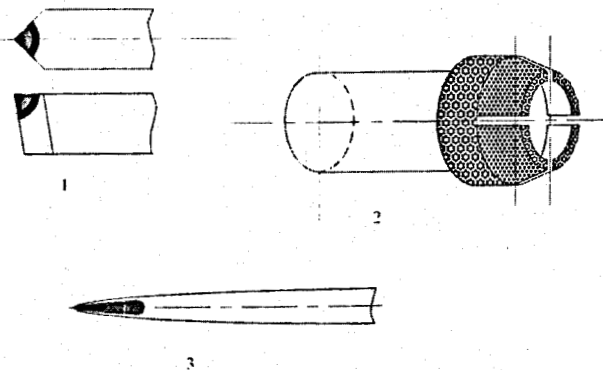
The diamond tools are to design for drilling, digging and machining:
